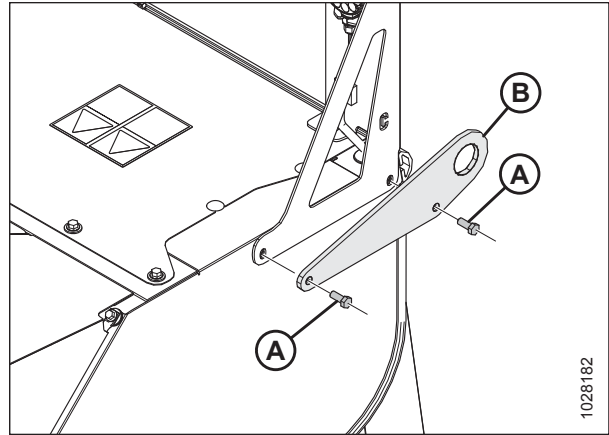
Shipping Plate – Right Side Shown, Left Side Opposite
